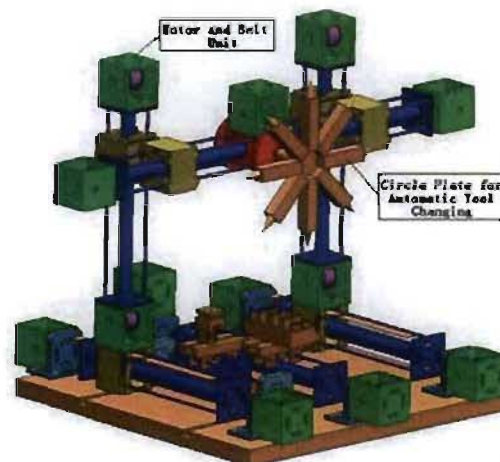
Circle plate automatic tool changing unit design for concept 1 [11].
